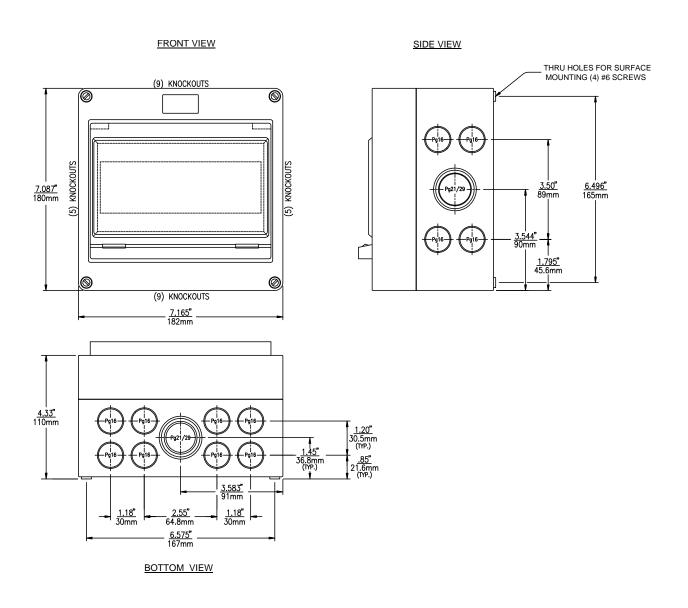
Two Module System Enclosure Dimensions (80-0006)
